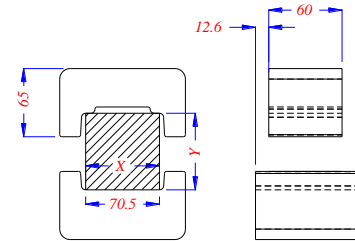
Method For Producing The Desired Profile Using Shaped Open Die By A Hydraulic Pressing Device With Loading Range Of 20-30 Mm.
